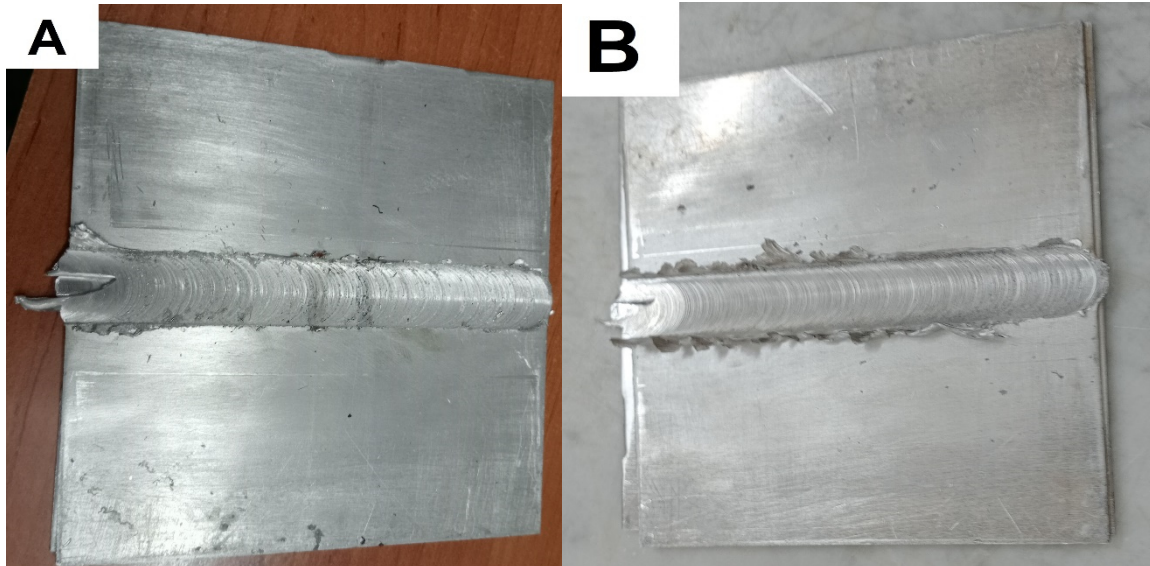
Friction Stir Welding Lap joints: A) 30 mm/min, B) 6mm/min
